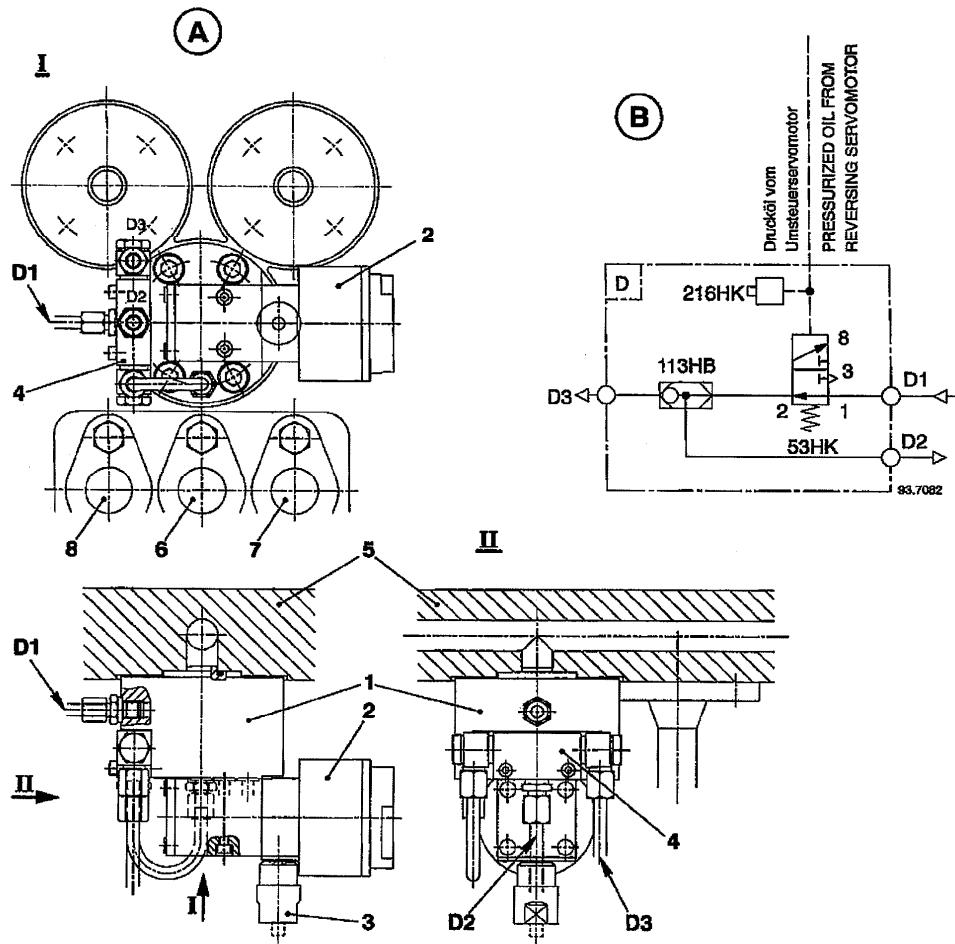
Arrangement of components in valve group “D” below fuel pumps
